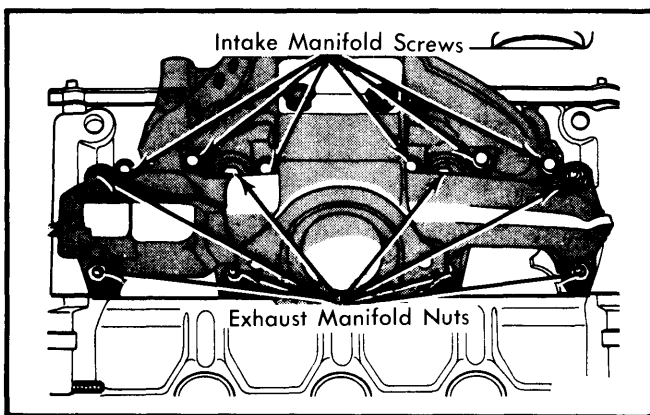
Removal and Installation of Intake and Exhaust Manifolds
